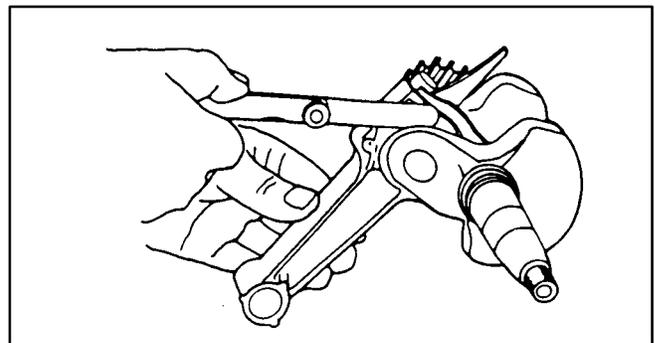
SIDE CLEARANCE OF CONNECTING ROD ON CRANK PIN
